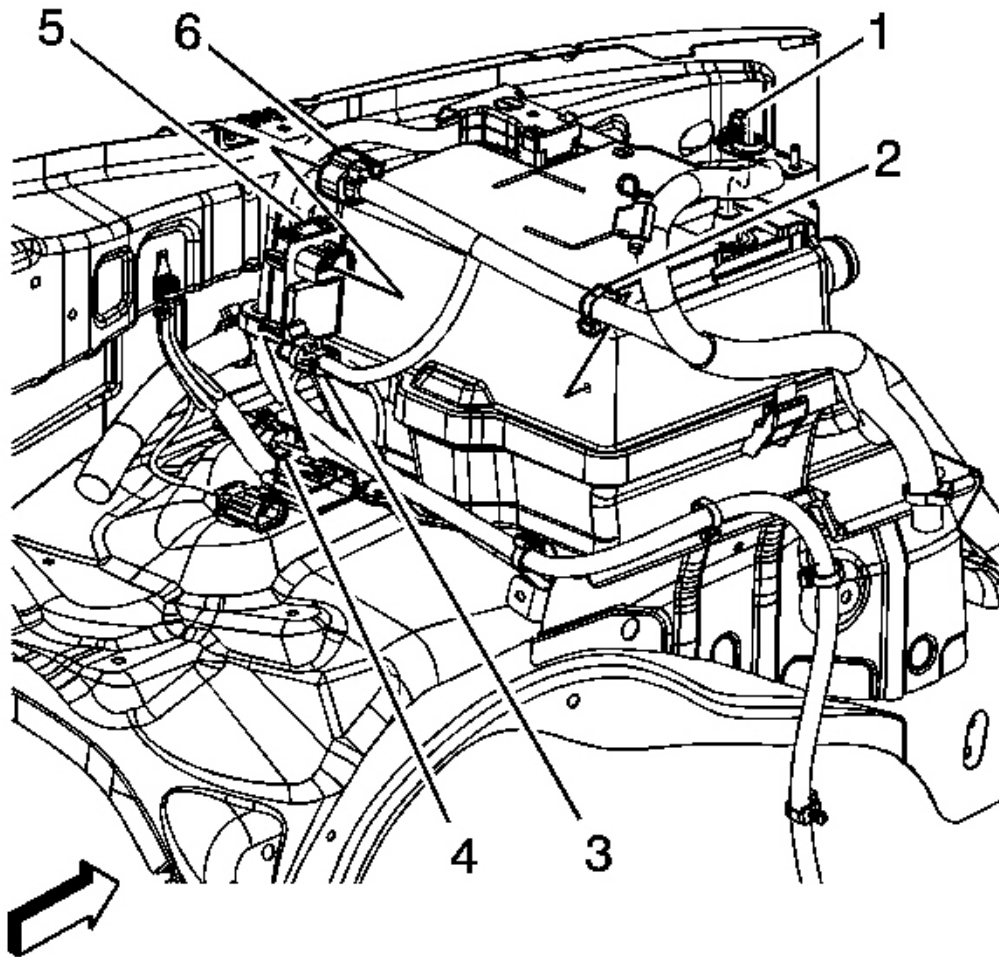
Engine Wiring Harness Electrical Connector & Battery Current Sensor
